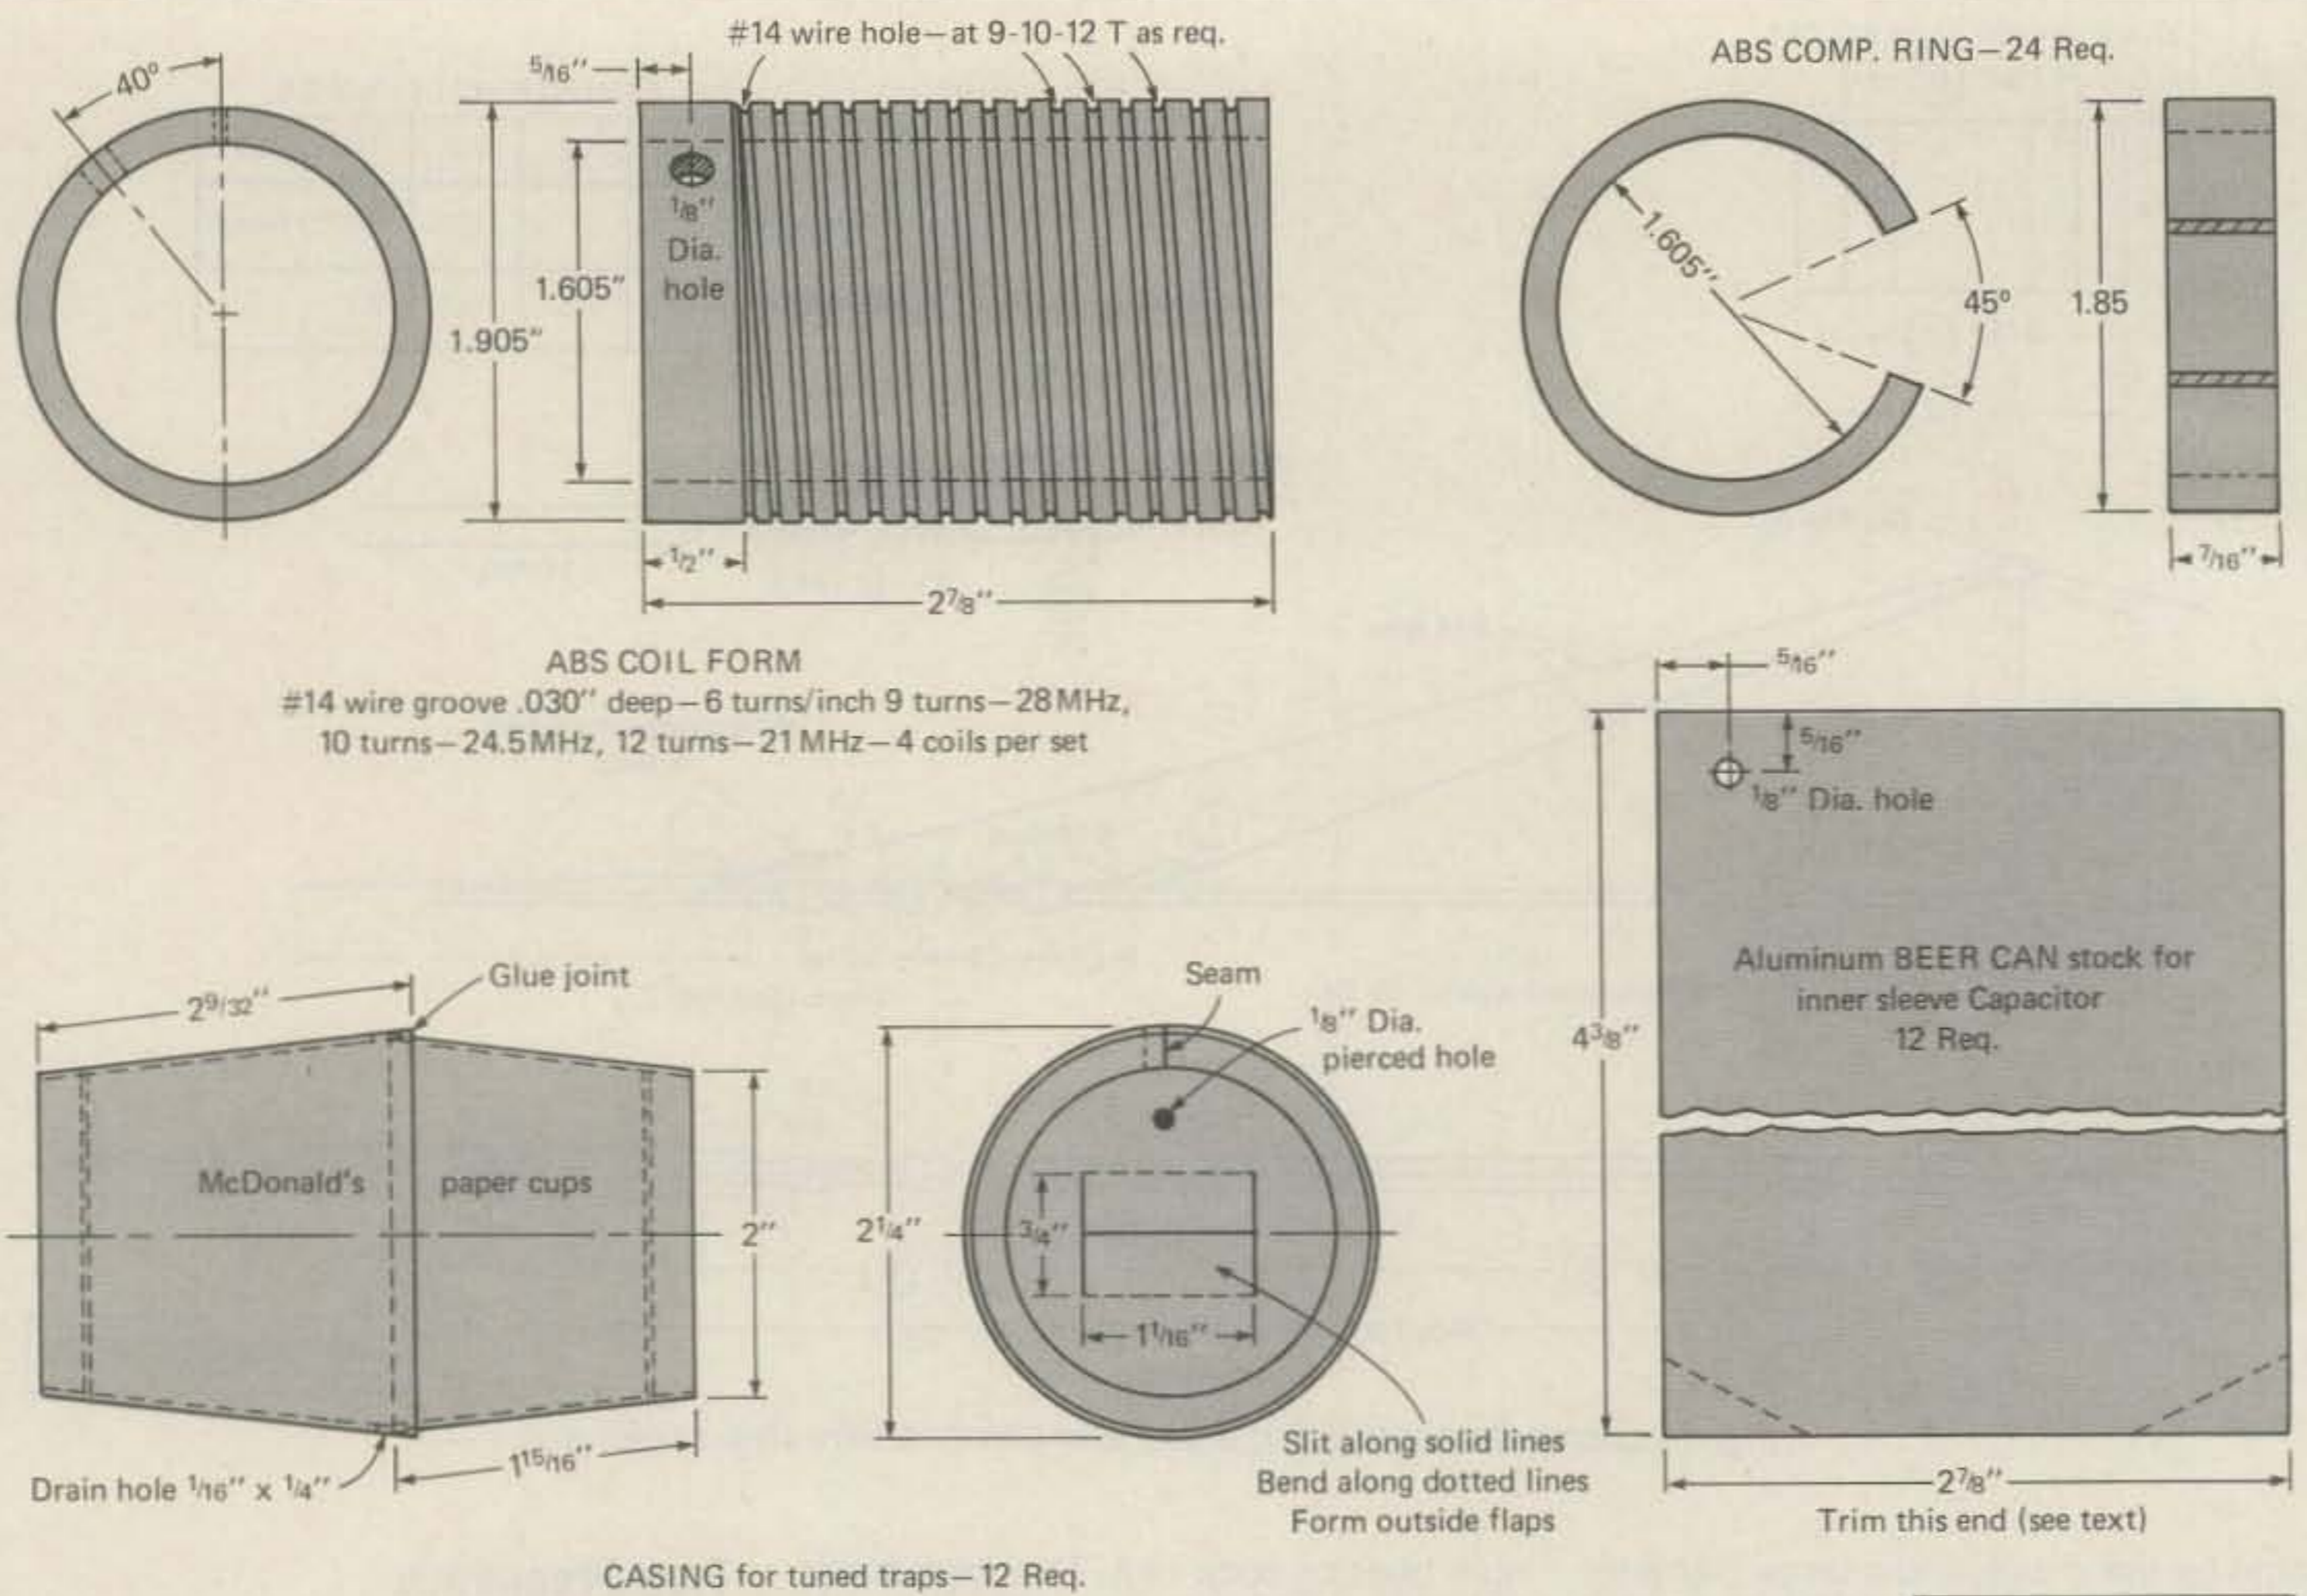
Primary parts for the tuned traps; see text for assembly directions.
